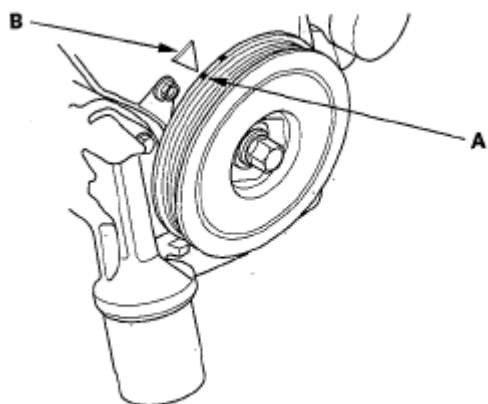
Identifying Timing Mark On Crankshaft Pulley
